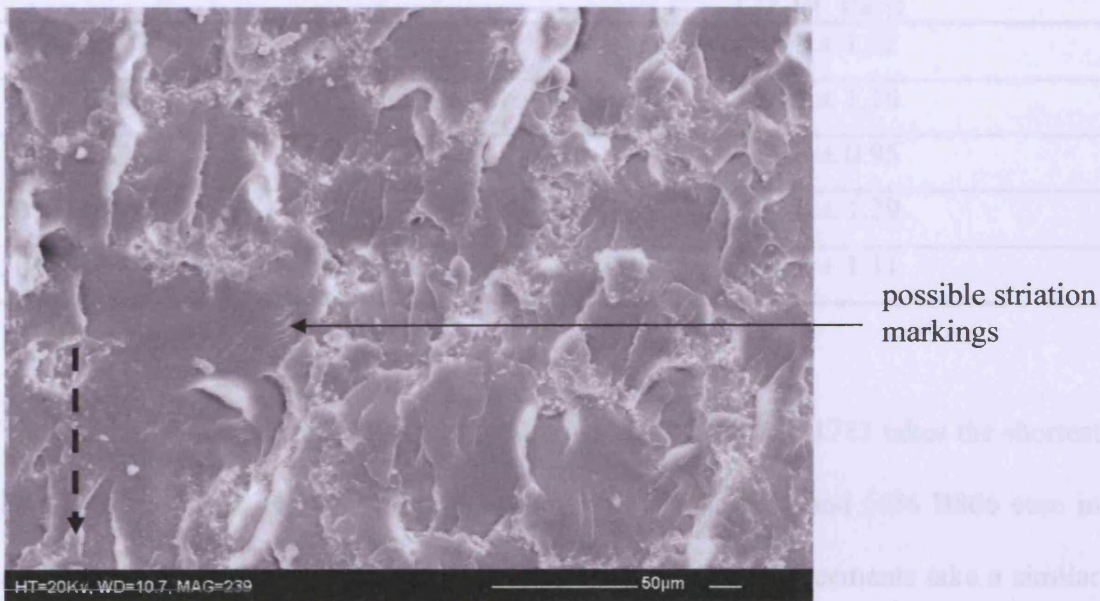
Fatigue fracture surface of 100% TS1881, magnification x 239
